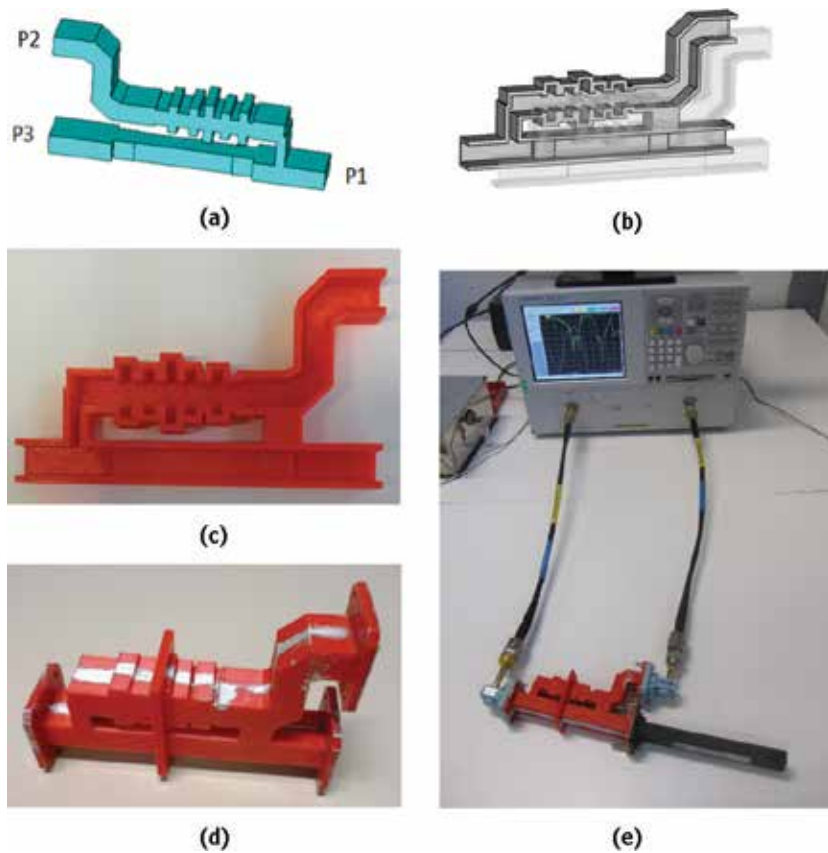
(a) Diplexer layout, (b) half CAD model, (c) one printed half, (d) the device metallized and assembled, and (e) measurement setup.
